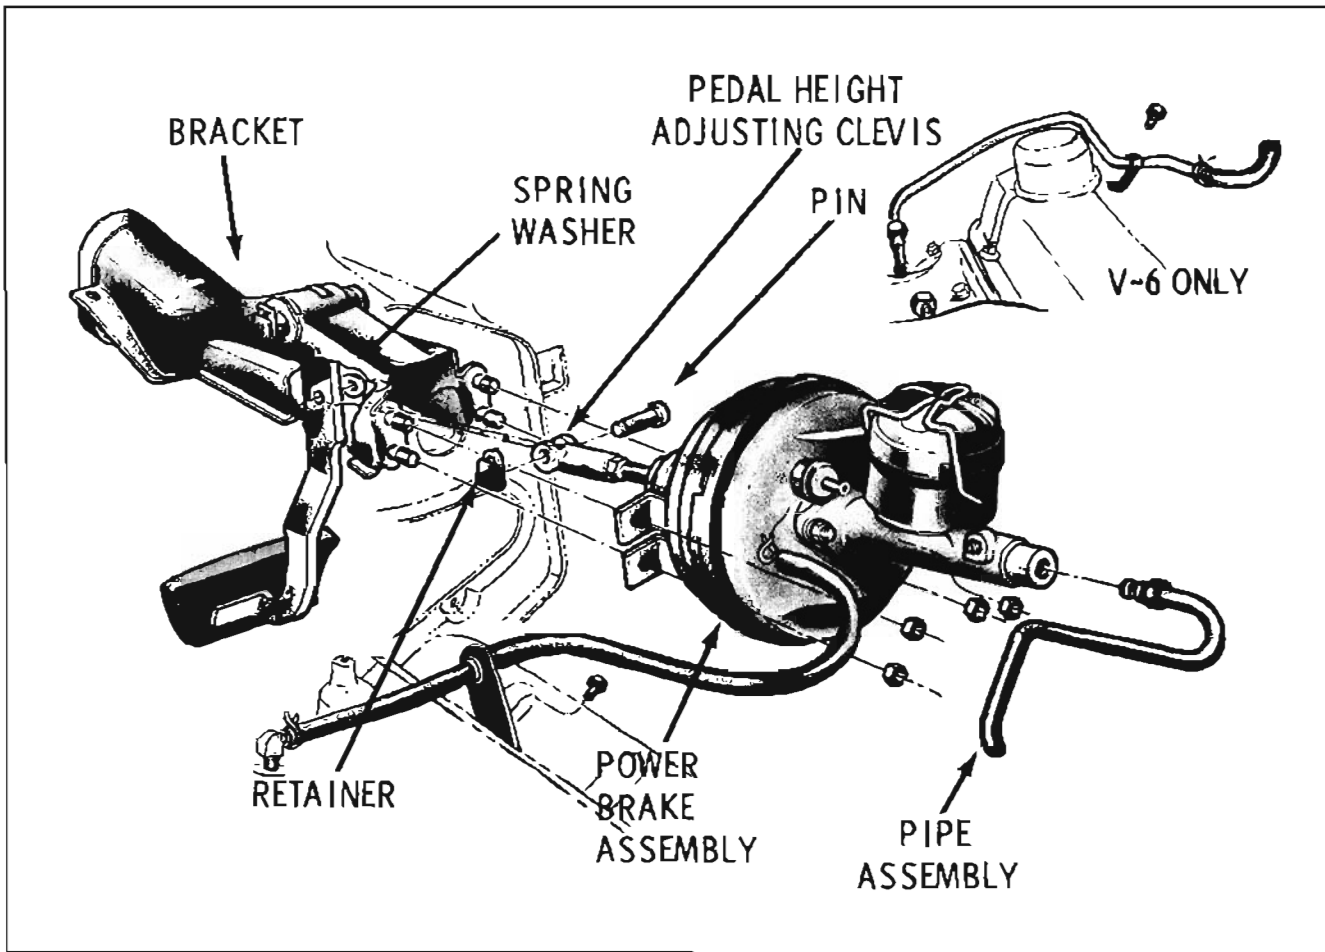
Power Brake Installation (30, 31 & 32 Series)
